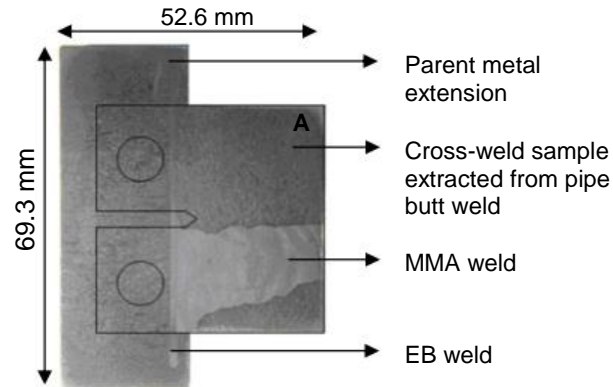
1: Photograph of the T-shaped welded specimen prior to machining the C(T) specimen.
